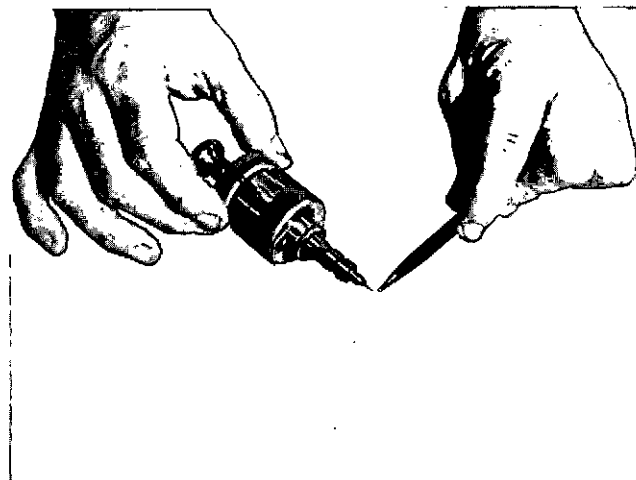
, (F60152). ST-708 Burnishing Tool point
